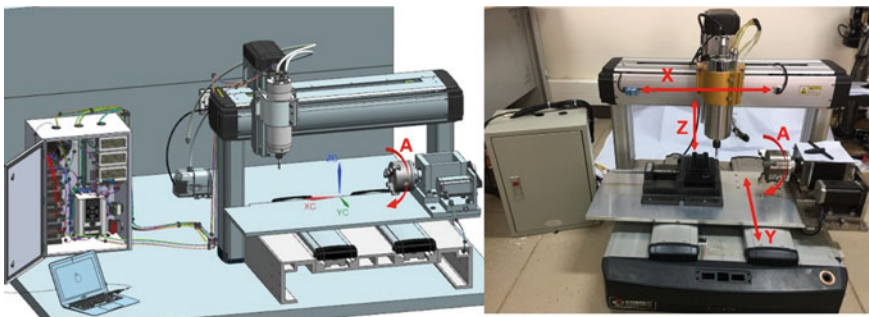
The design and manufactured of 4 axis CNC milling machine
